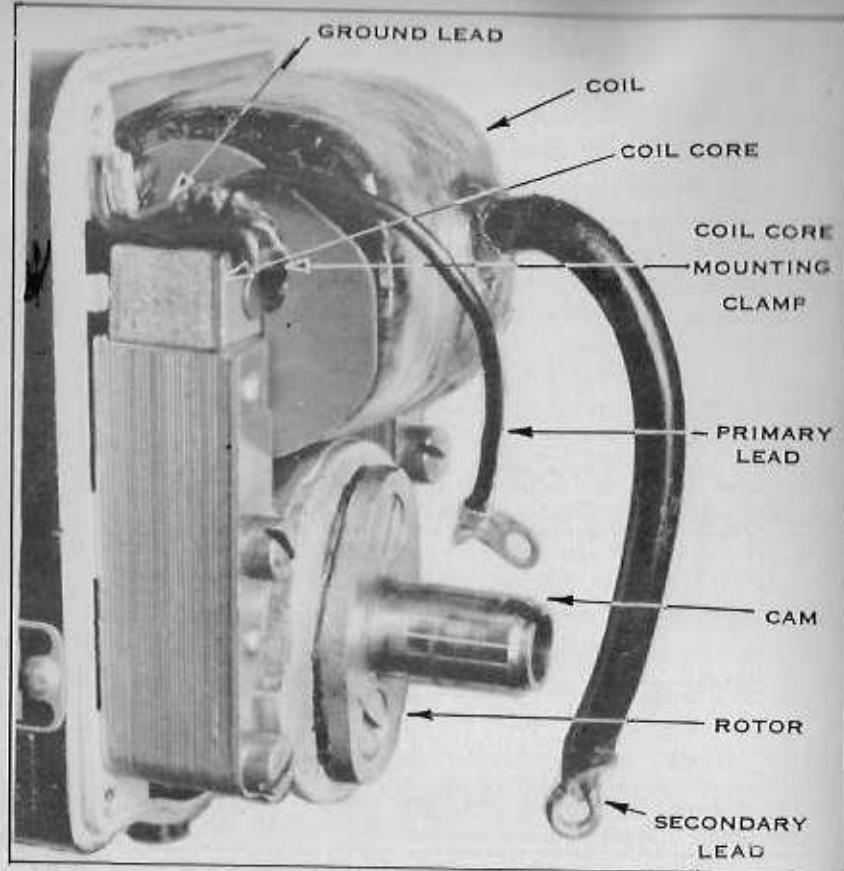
MAGNETO (SHOWING COIL MOUNTING)
